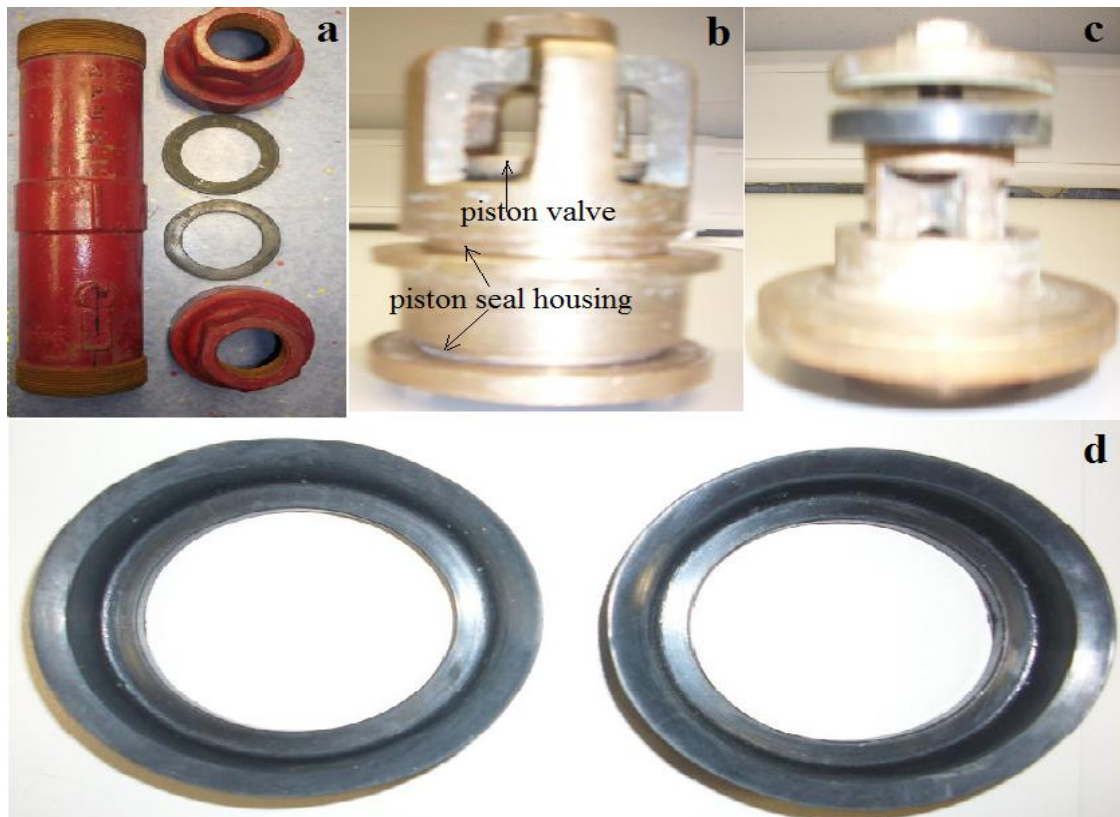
Components of the cylinder assembly of the piston seal wear test rig: a) cylinder and caps; b) piston; c) foot valve; d) piston seals
